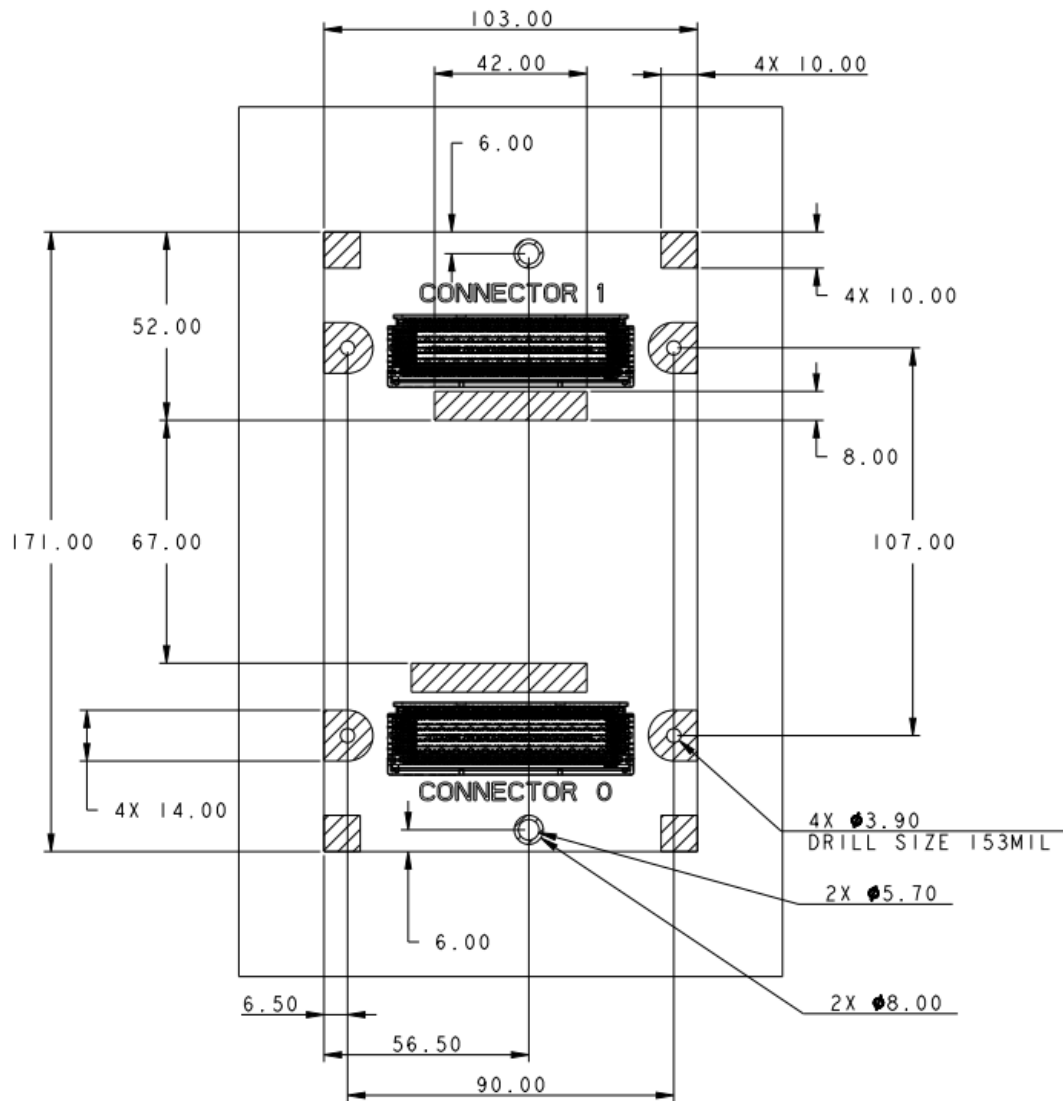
Baseboard KOZ and Grounding Pad Dimensions
